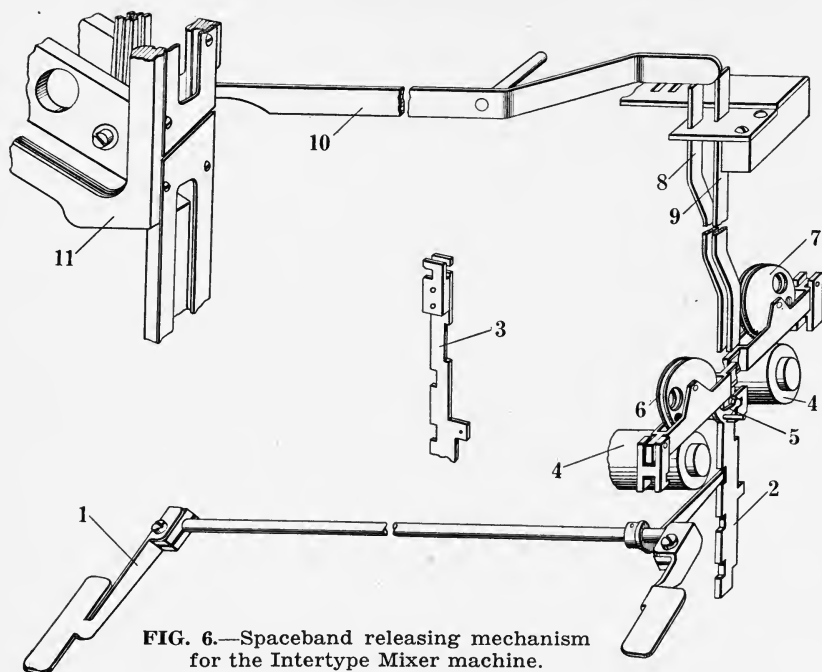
Spaceband releasing mechanism for the Intertype Mixer machine.
